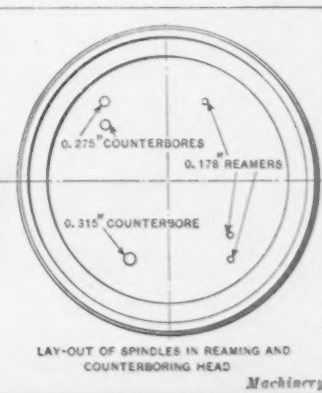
Lay-out of Spindles in Reaming and Counterboring Head
